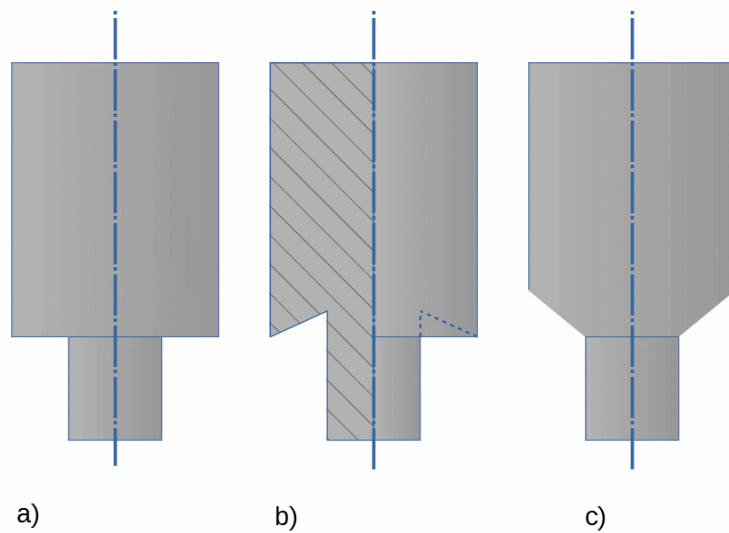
Schematic of FSW tool shoulders: a) flat b) concave c) convex
